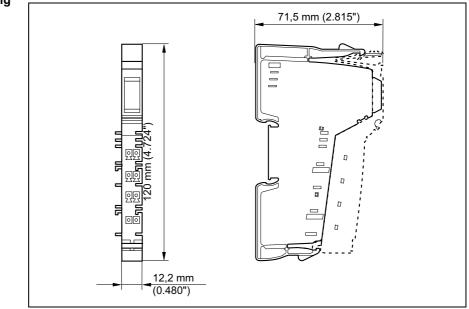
Dimensions of the electronic sockets (2-slot housing)
